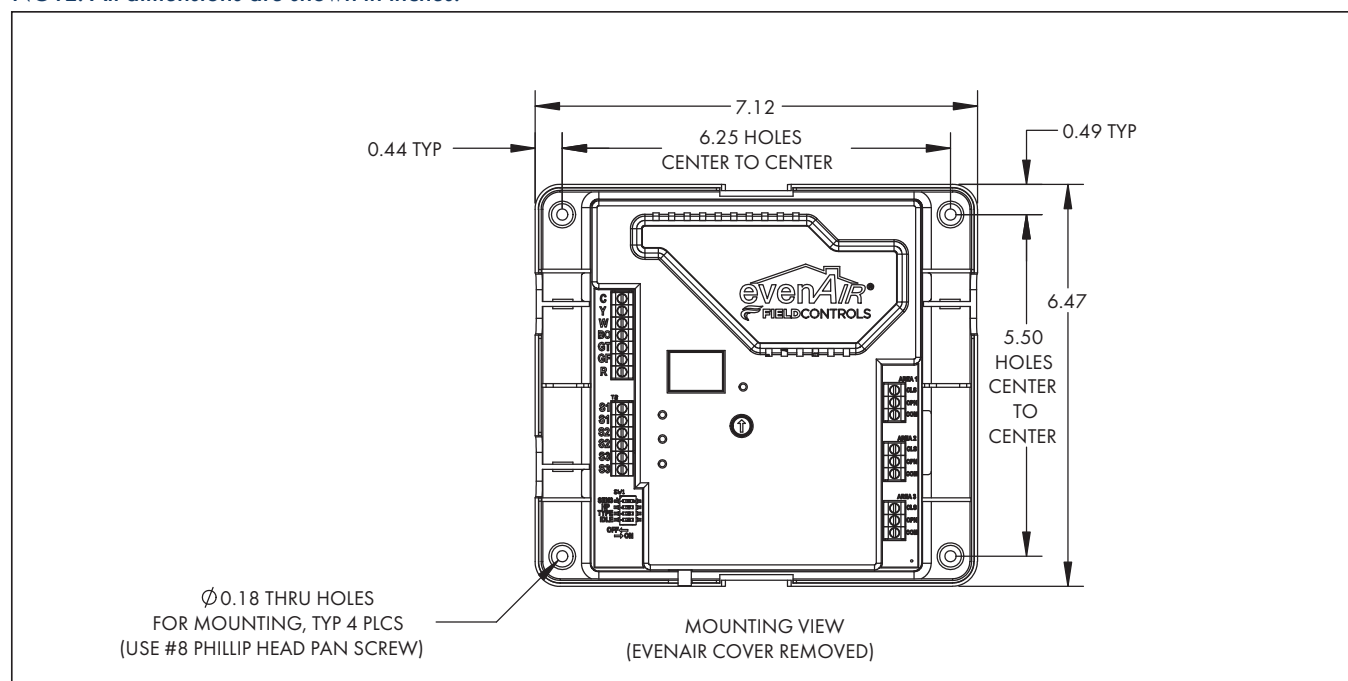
Mounting Hole Dimensions of EvenAir 2.0 Control Enclosure with Outer Cover Removed
